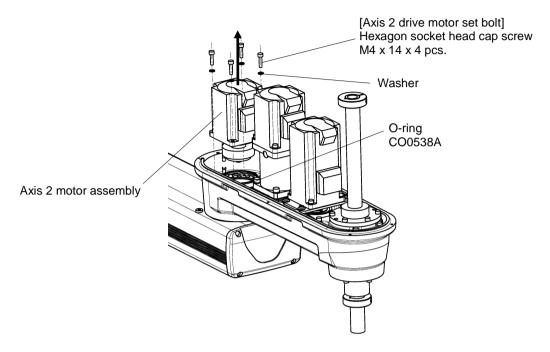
Dismounting axis 2 motor assembly (KHL-500, KHL-600, KHL-700)
